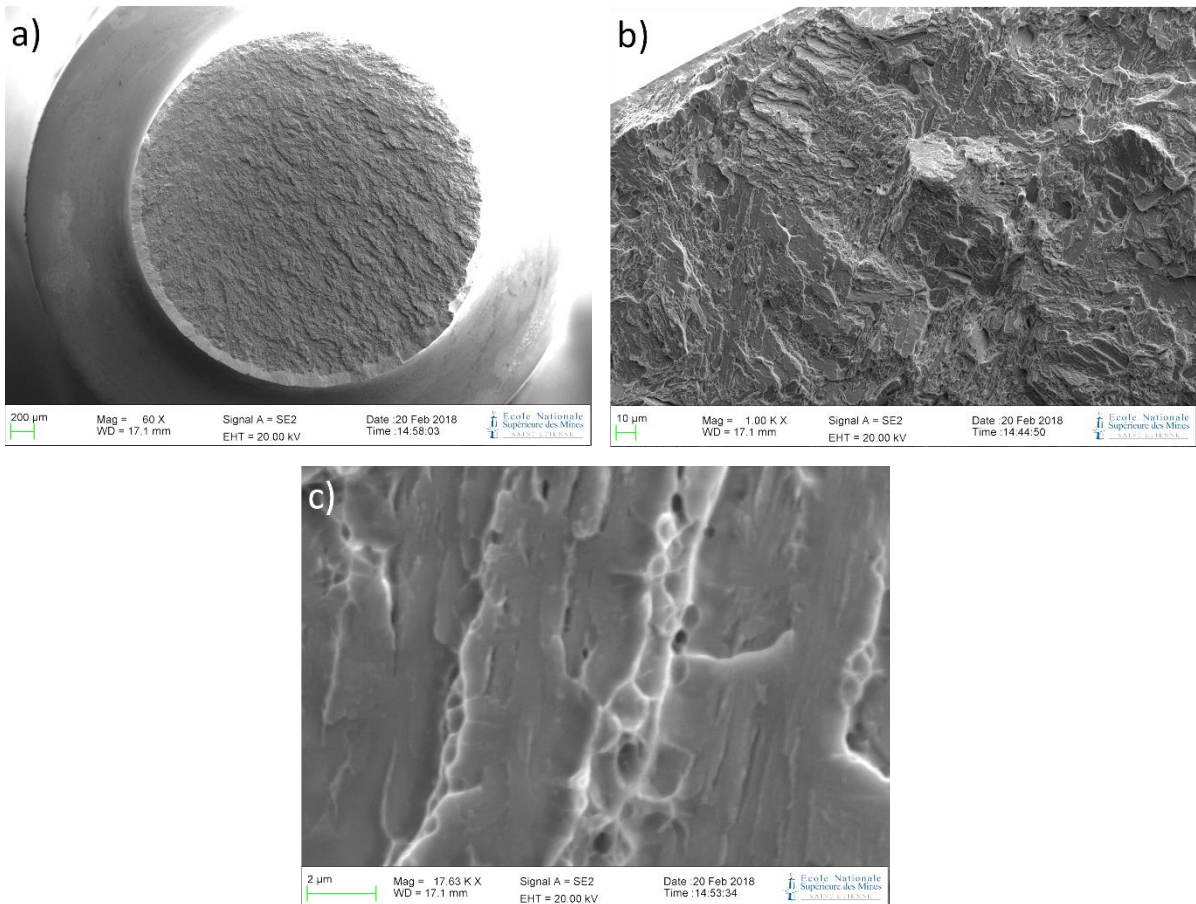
Fracture surfaces of 1000 MPa loaded protected notch tip specimen.
